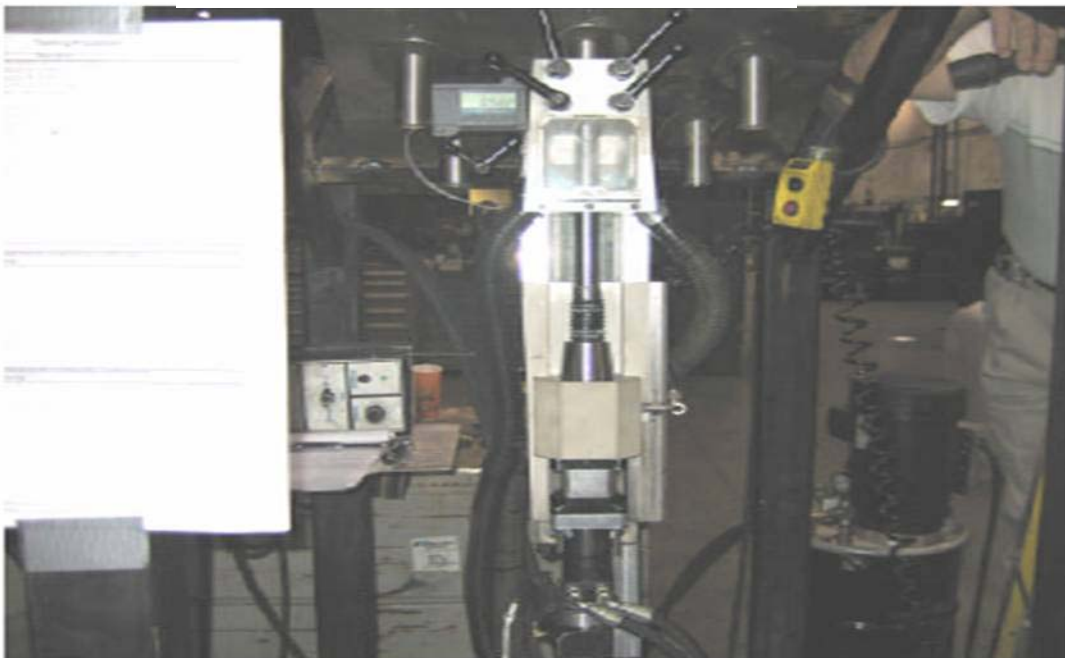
Encapsulation Tool (Reams Out Old Sleeve)
